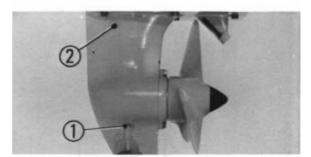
① Oil filler port (Drain bolt hole)
